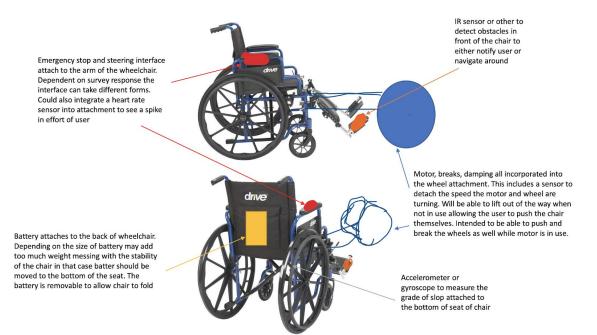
Attachable wheel to the front of the wheelchair [4, modified]
